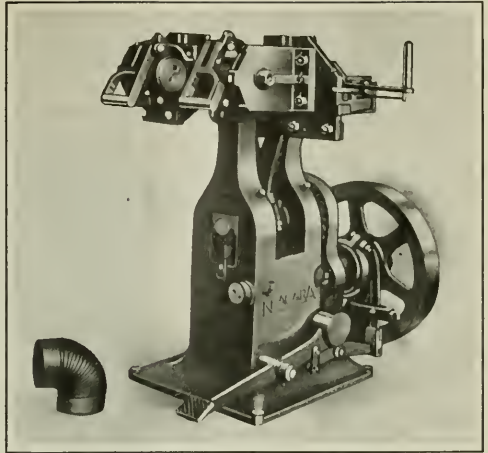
Bending Machine with Chucks in Positions occupied prior to an Operation
